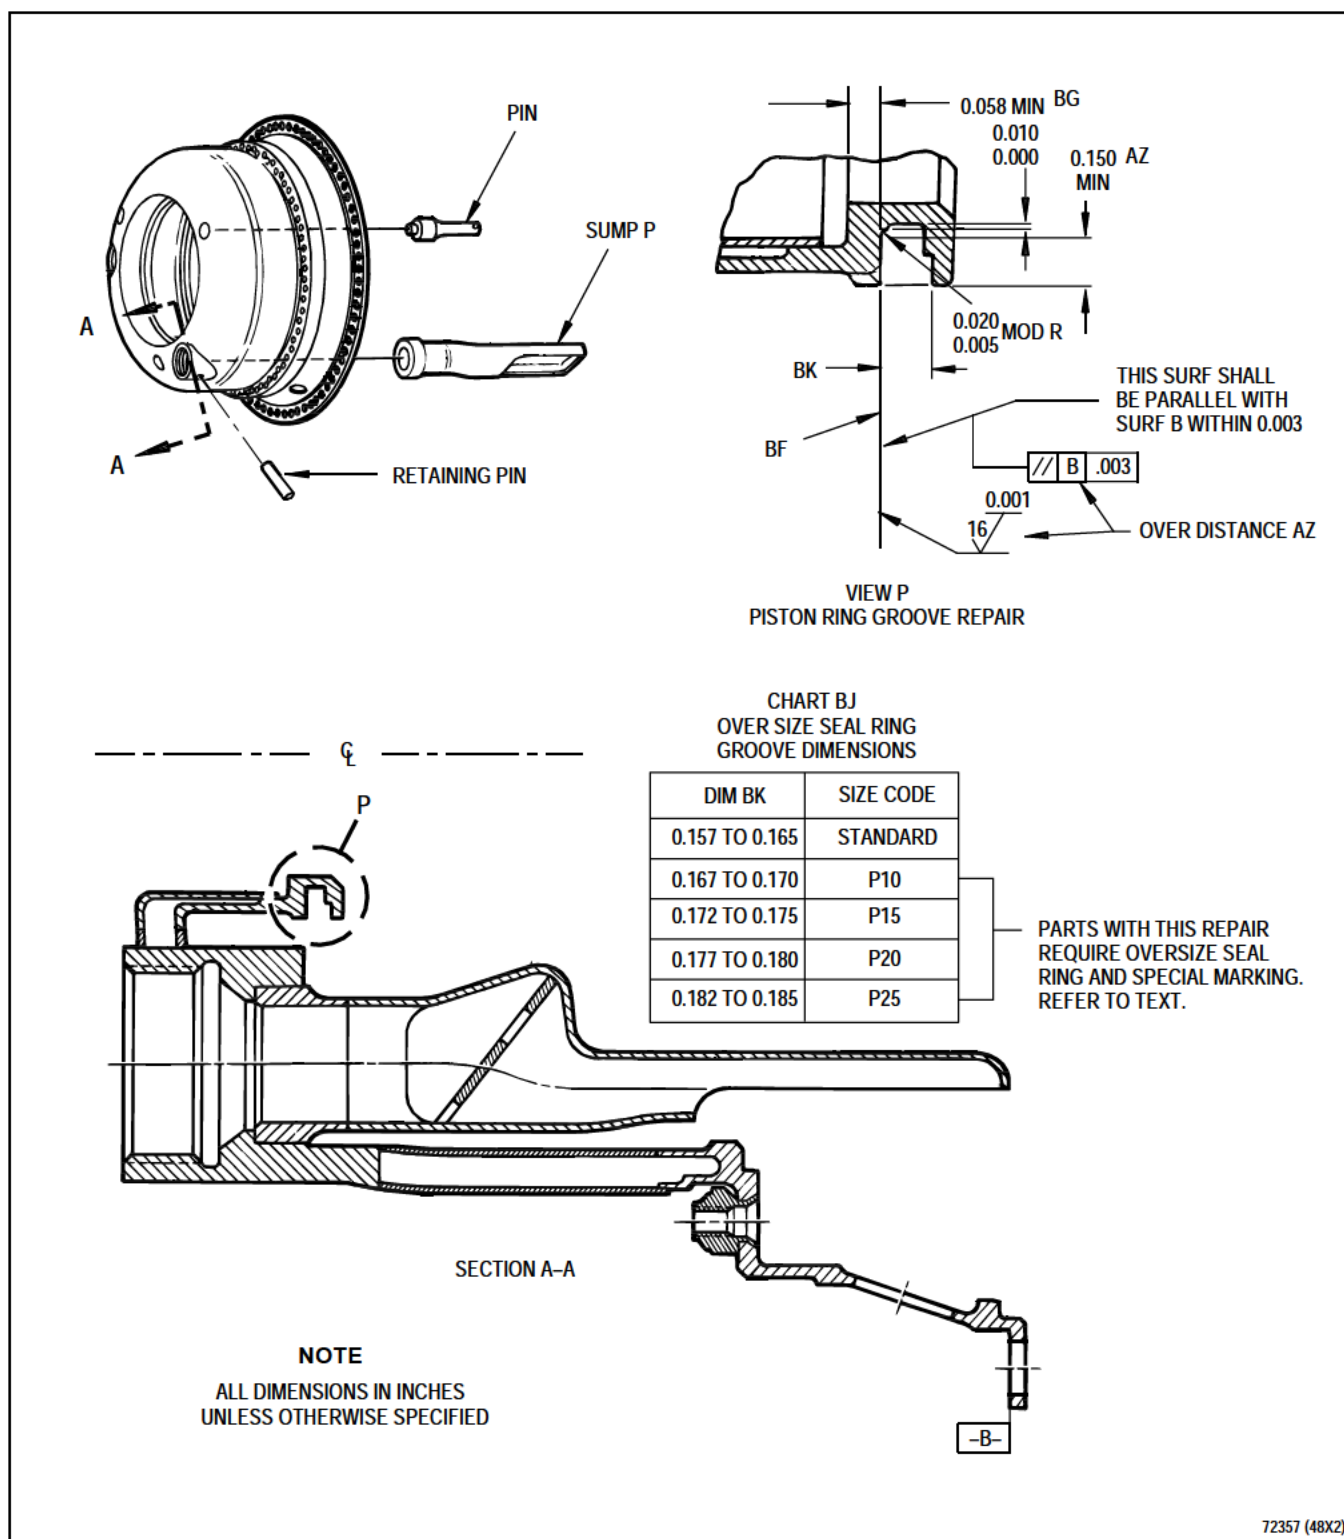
No. 4 Bearing Front Seal Support Assembly (Typical PN 4080082) - Machining Piston Ring Groove Oversize
